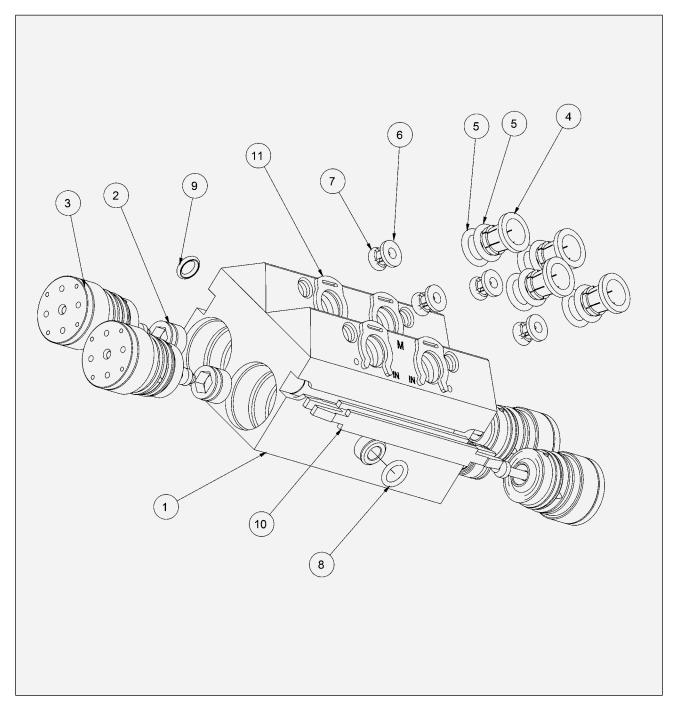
A10732 (Metric) & A10962 (English) 4-Color Valve Dead Head Assembly
